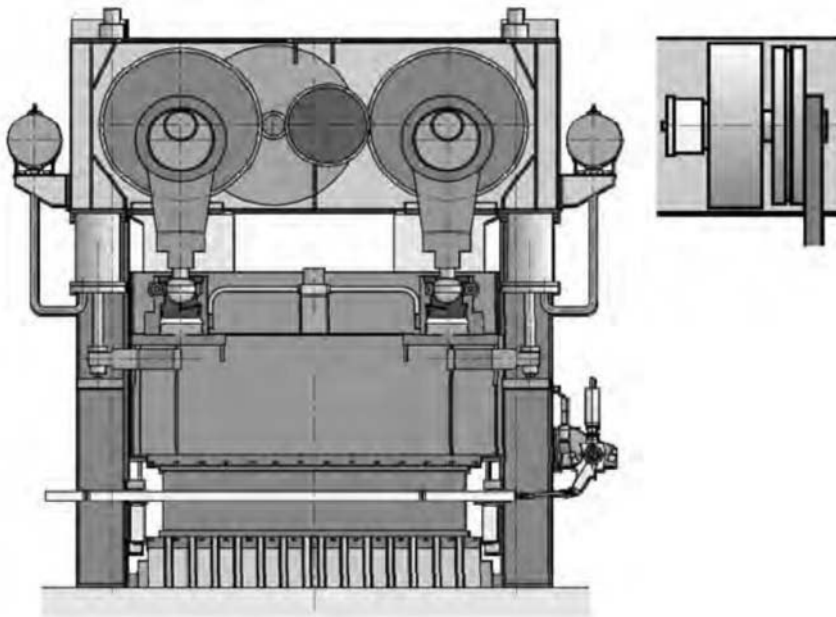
A conventional four-point straight-side mechanical press drive. Source: Ref 11.12
